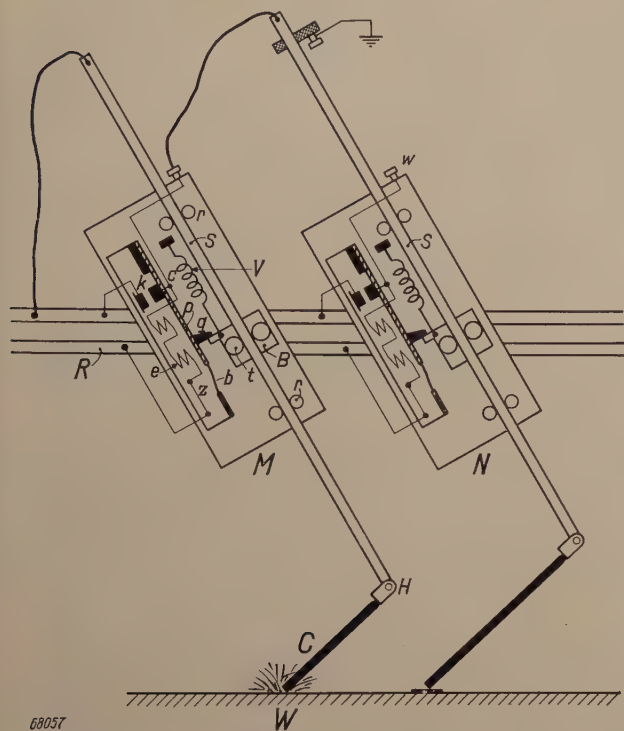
Schematic drawing of two welding heads  $M$  and  $N$ , each fitted with a system for automatically retracting the guided bar. The electromagnet  $e$  is energized by the current beginning to flow through the welding electrode of the next head. It then attracts the steel armature  $p$ , the pawl  $q$  thereby releasing a stop, the spring  $V$  then clamping and drawing up the bar; at the same time the heavy contact  $k$  is closed, thereby shorting the winding of the magnet and allowing the welding current, of say 300 A, to flow from the welding head  $N$  via the terminal  $c$  and contact  $k$  to the rail  $R$ . The armature  $p$  is held in its new position by the leaf spring  $b$ , which has two states of equilibrium,  $z$  is a safety fuse.
